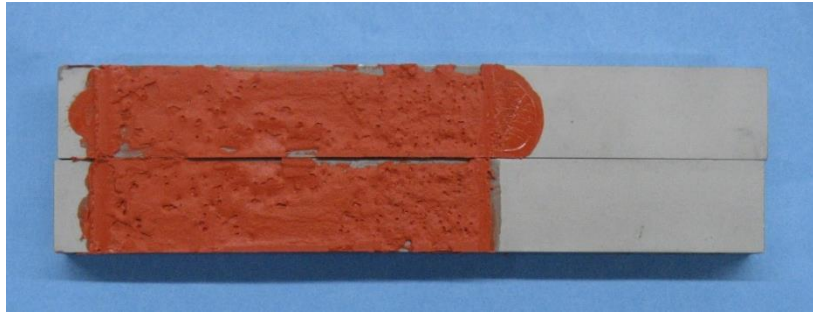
Representative fracture surface of DCB specimen (tested at -65°C)
